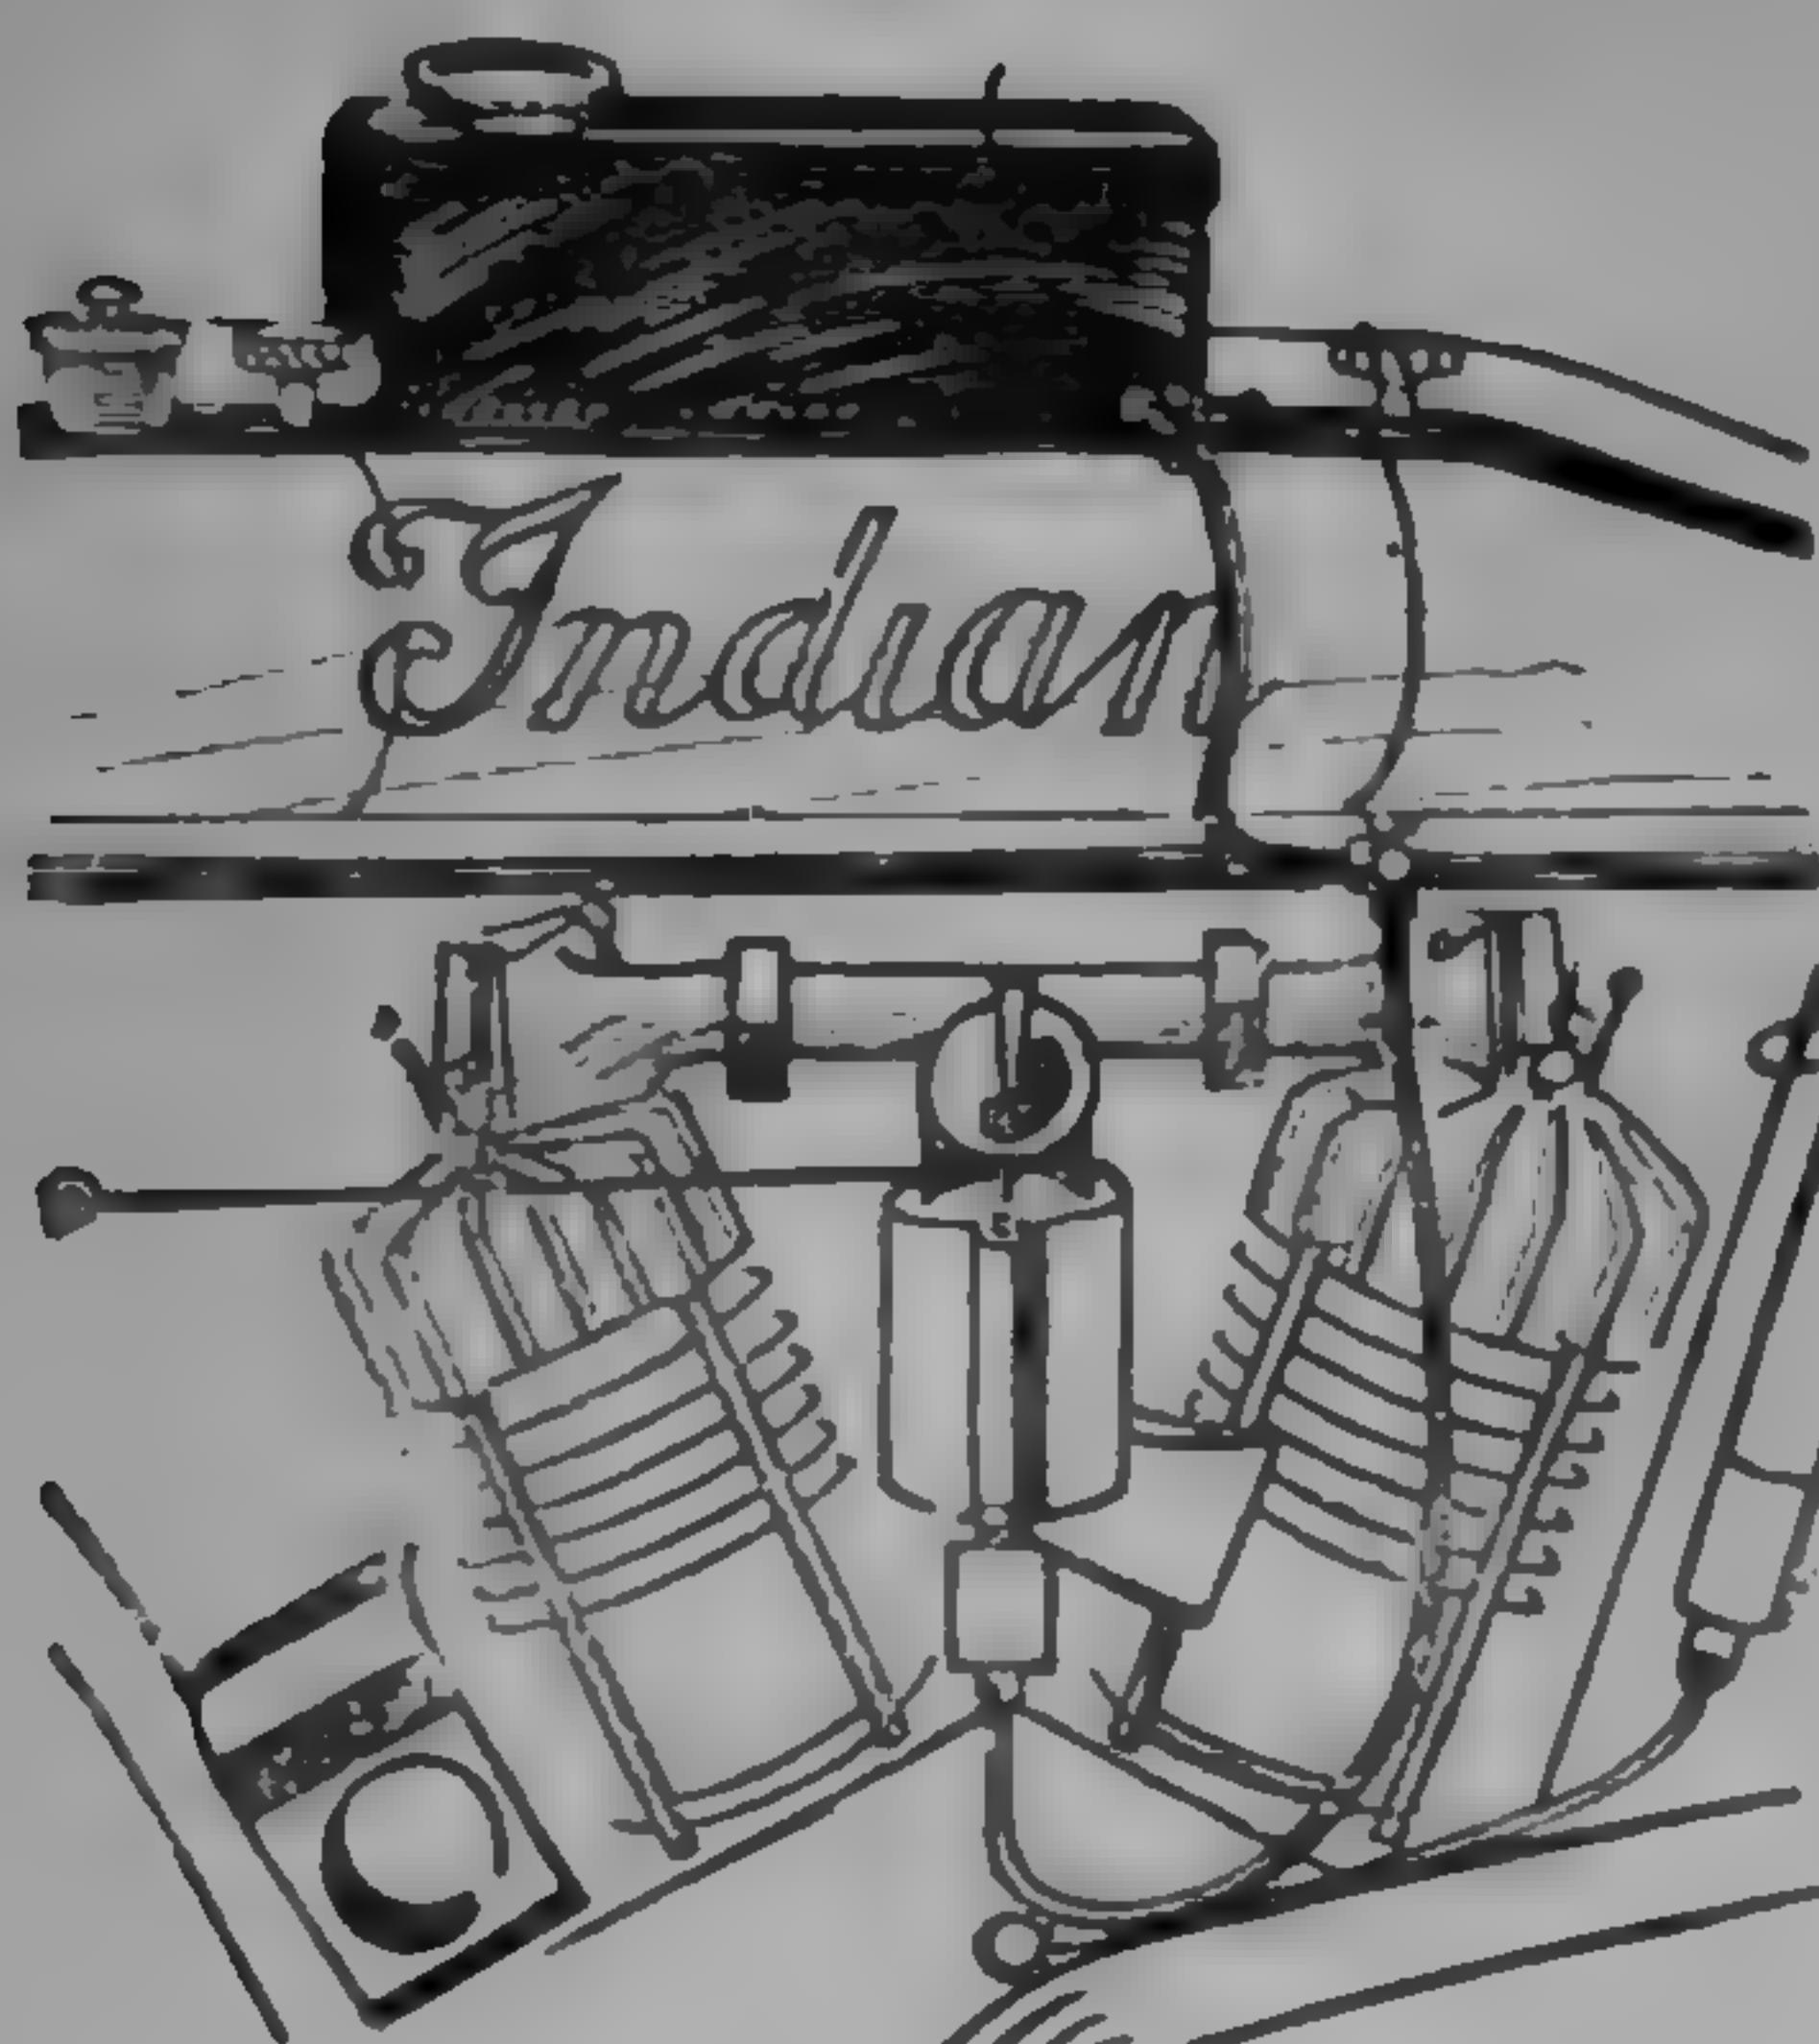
Illustration No. 1.—Converting an Indian toolbox into auxiliary tank. The lid is provided with a filler cap and is soldered to the sides.
